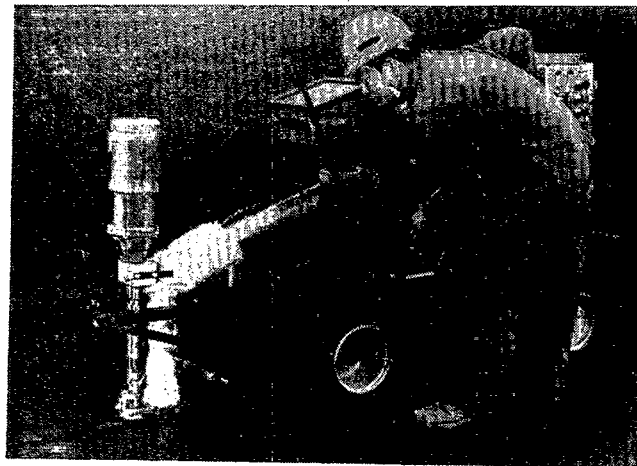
Photographs of Various Types of Extrusion Fillet Welding Devices
